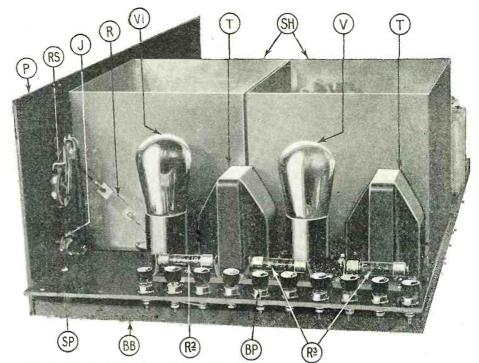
This illustration shows the assembly of the audio-frequency amplifier. V is first A.F. tube and V1 is the power amplifier tube. SH indicates the shielding for the R.F. amplifiers.
